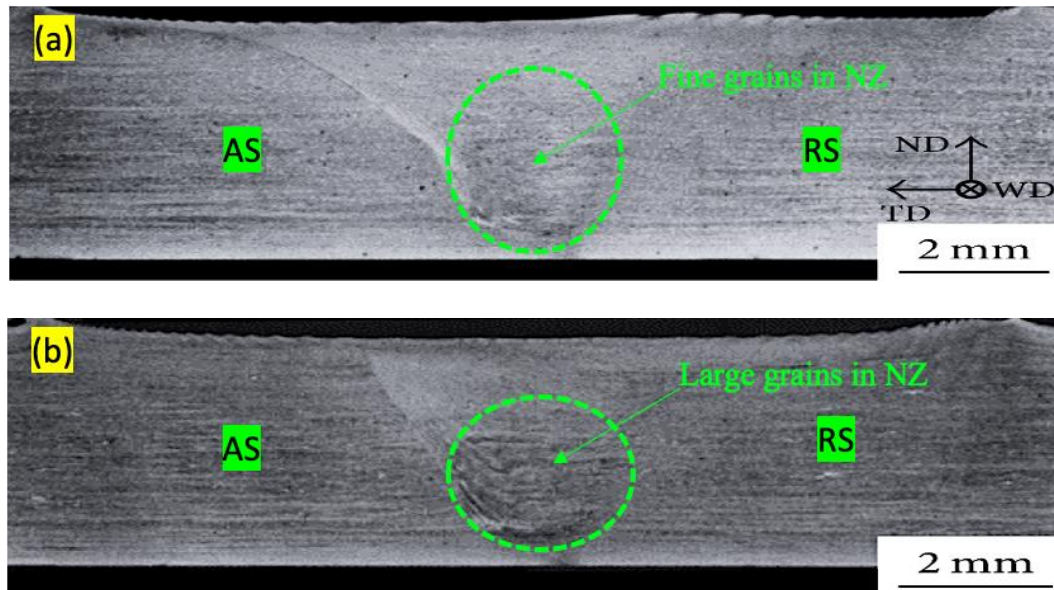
Bead geometry of the IA-FSW specimen (a) Sample – 3 (b) Sample – 4
